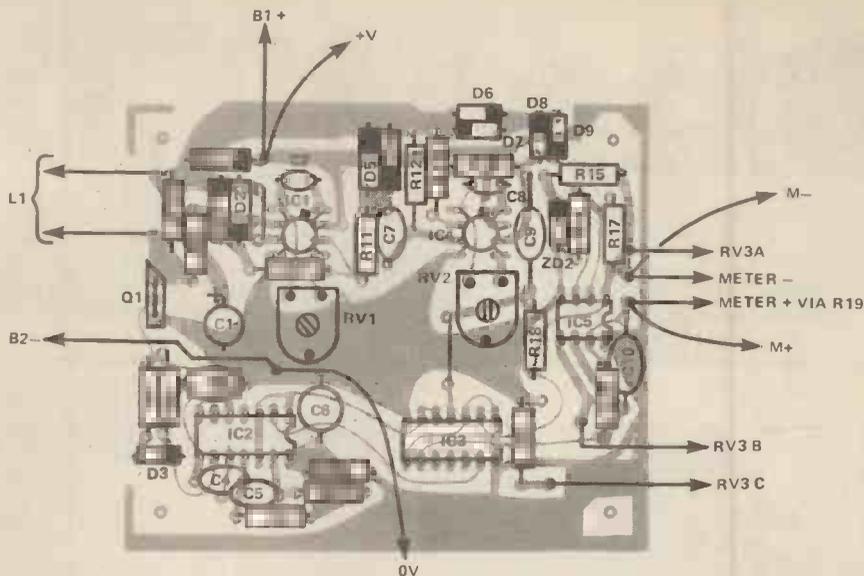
The Diana PCB, indicating the connections to the VCO board.
